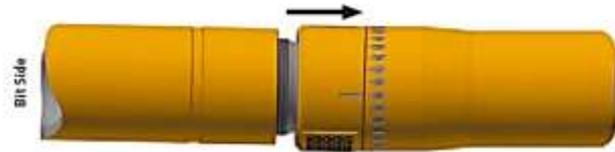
Engaging teeth back to adjusting sleeve
